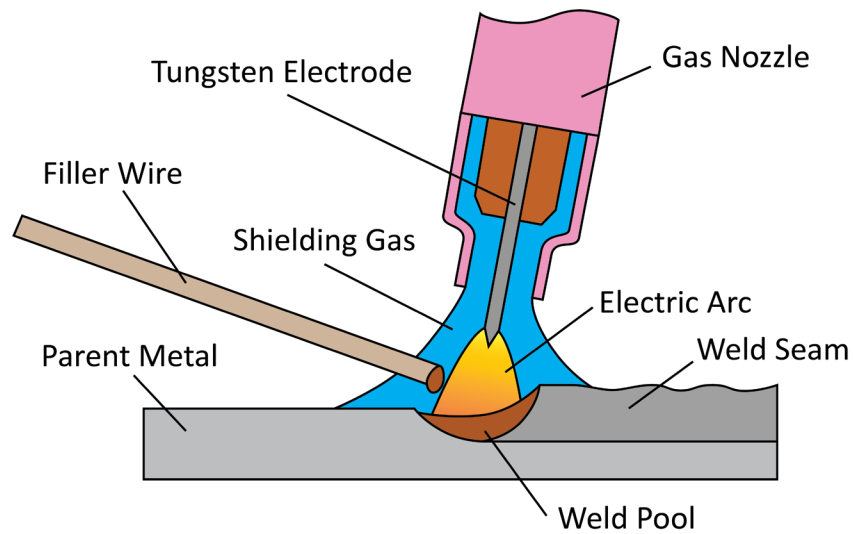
Gas Tungsten Arc Welding process diagram.
